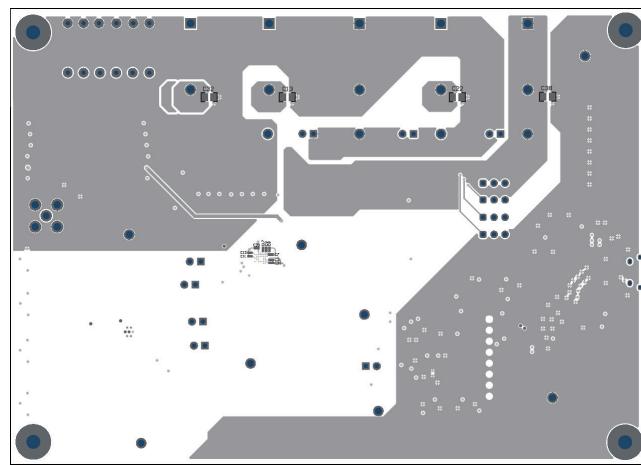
AMC8V208EVM PCB Bottom Layer Layout
